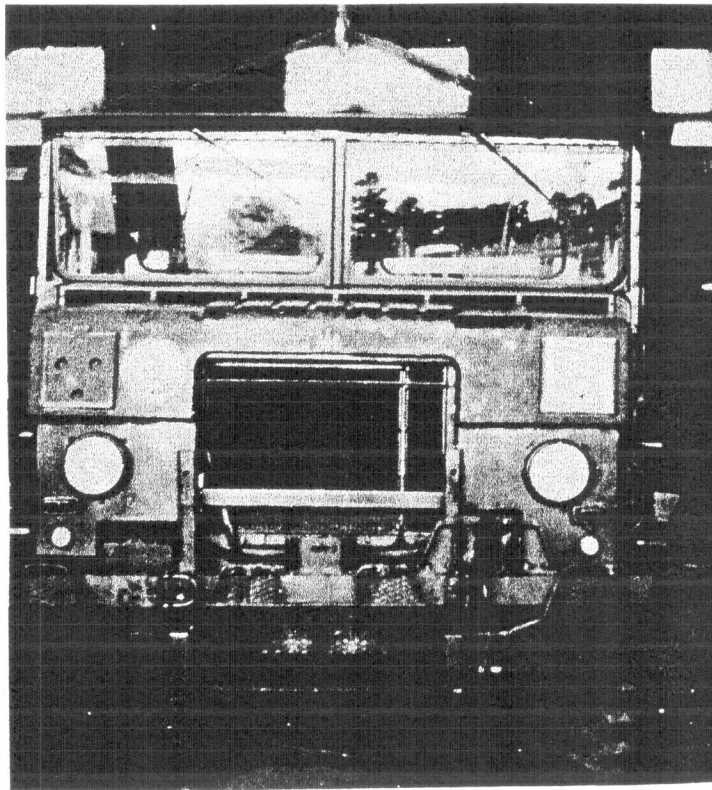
LIFTING BOARD AND SLING POSITIONED IN CAB - FRONT VIEW
